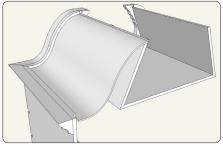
Use the Offset Tool to create an edge of the curved bonnet top, then use the Push/Pull Tool to make it the proper depth.
